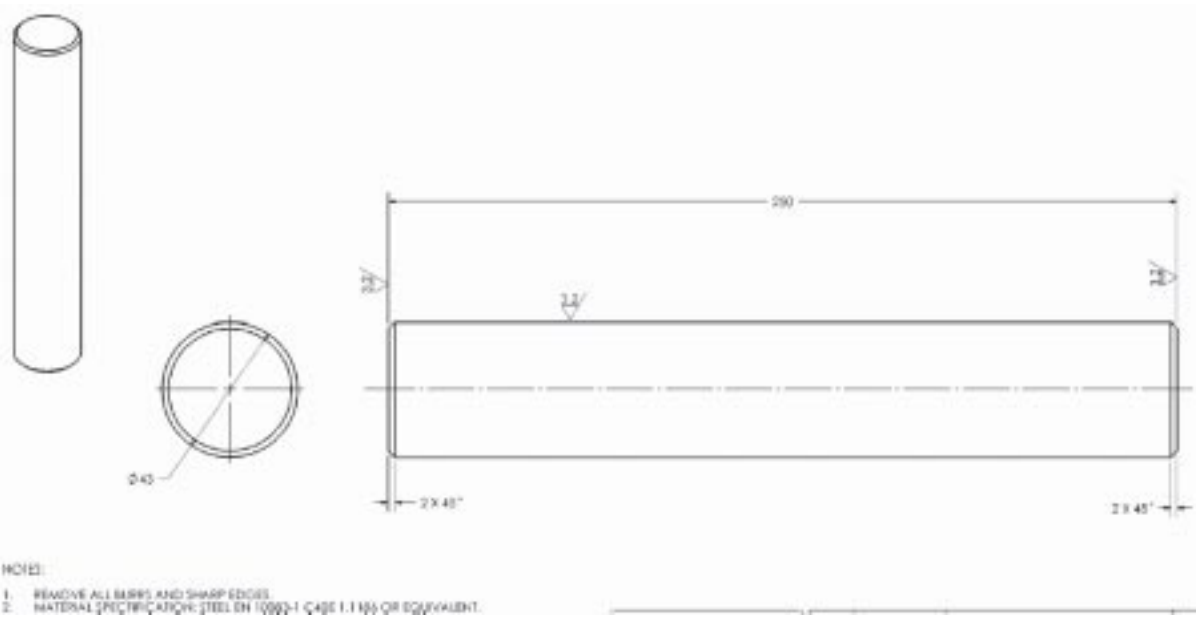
LWB Bush Insertion tool 2(Section 180-0020, SUSPENSION SYSTEM- FRONT SUSPENSION)
